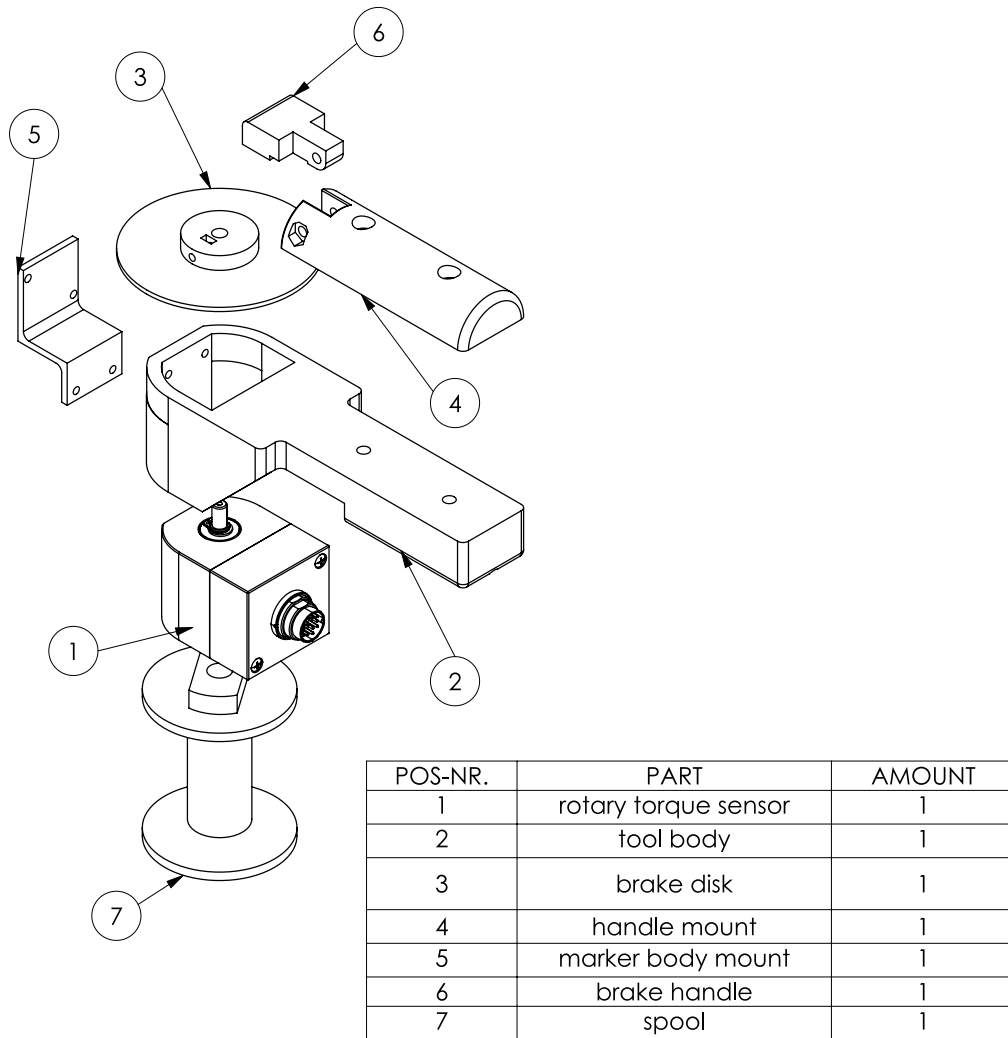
Exploded view drawing of the teach-in tool with parts assigned.
